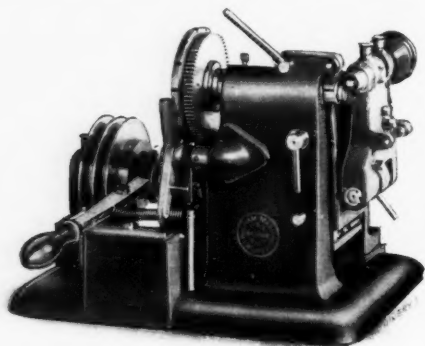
Automatic Face Clutch Cutting Machine for Small Work
